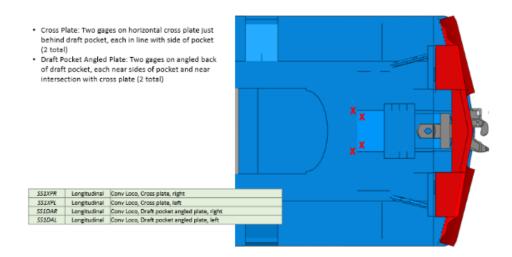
Strain Gages on the Cross-plate and the Draft Gear Pocket Back Plate
